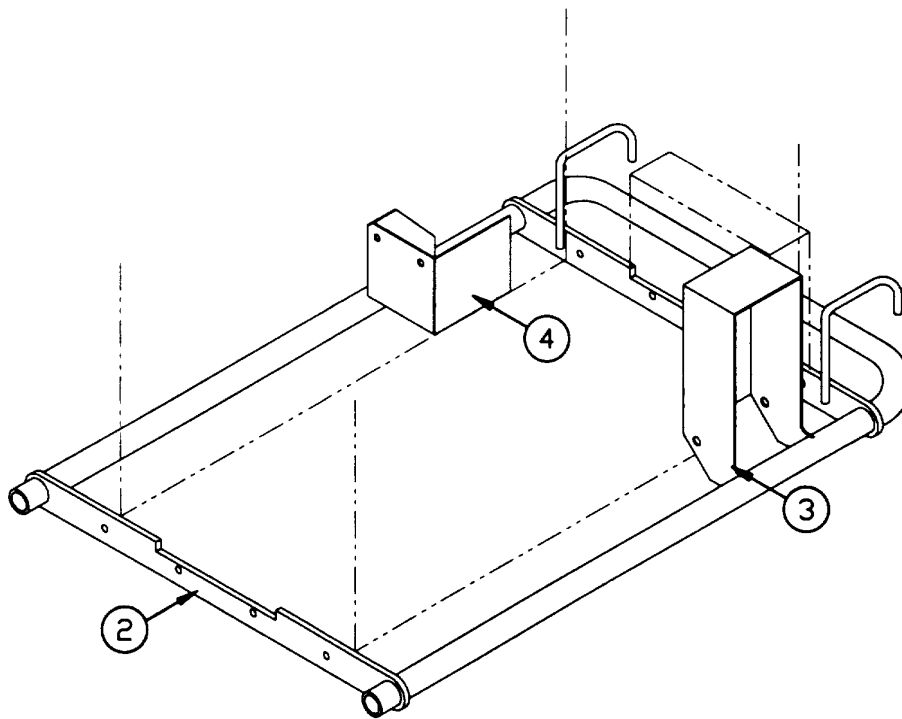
HANDLE ASSEMBLY, BOTTOM
